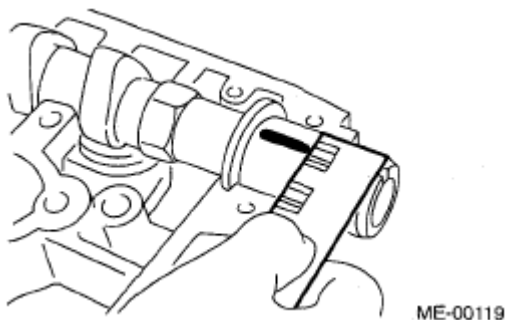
Measuring Widest Point Of Plastigauge On Each Journal
